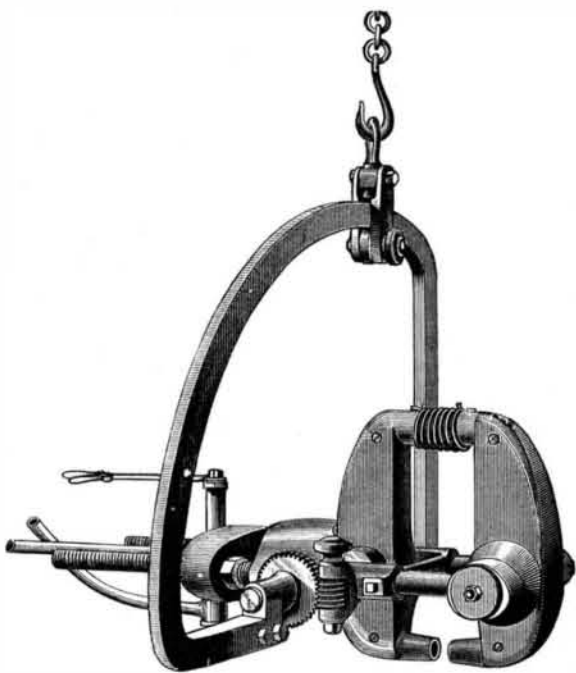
SUSPENDED RIVETING MACHINE—SIDE VIEW.
